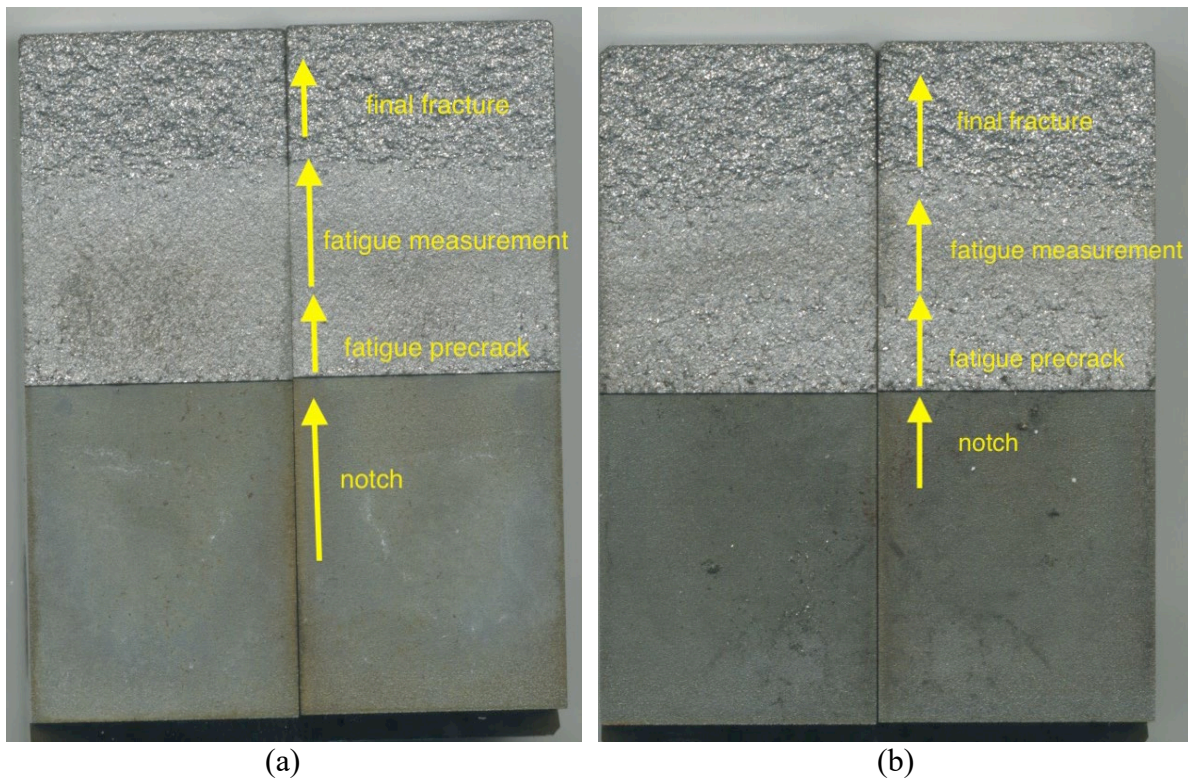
Fatigue/fracture surfaces: (a) AHH Slice 2 (smooth fatigue crack surface), (b) HH Slice 2 (rougher fatigue crack surface), $R=0.1$
